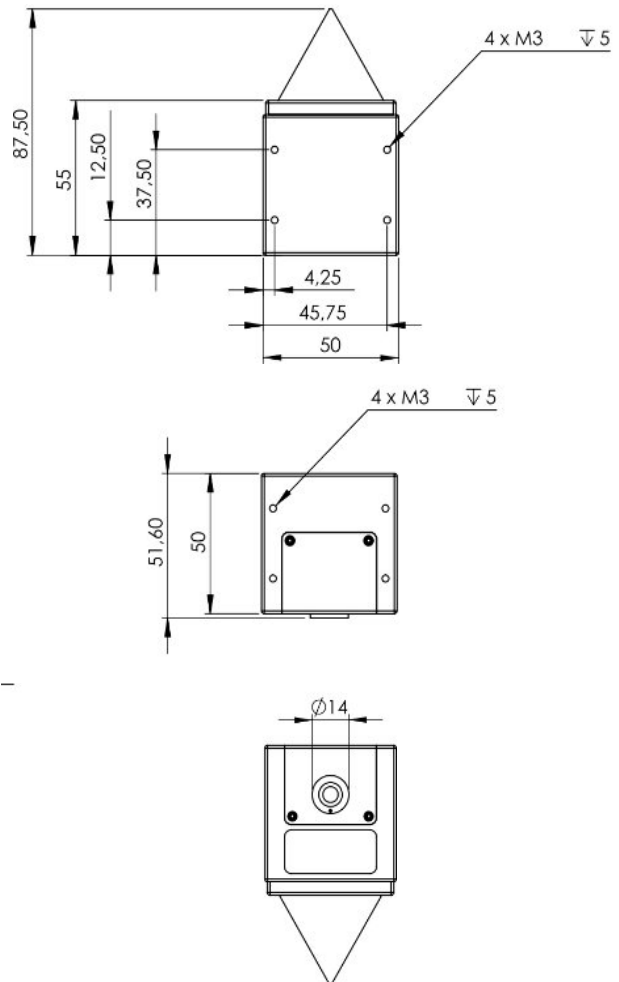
Dimensional drawing Industrial Cube sensors LEDB3.3, LEDR3.3
